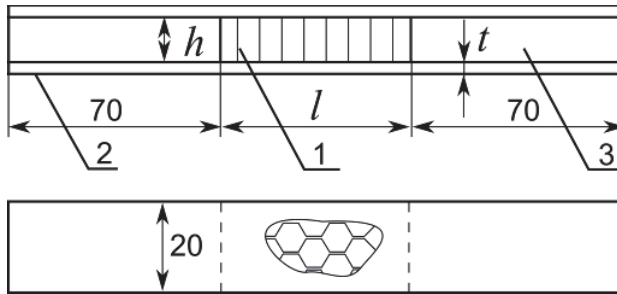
Geometrical parameters of specimens: 1 – honeycomb core; 2 – FRP outer layers; 3 – embedded elements for clamp.
